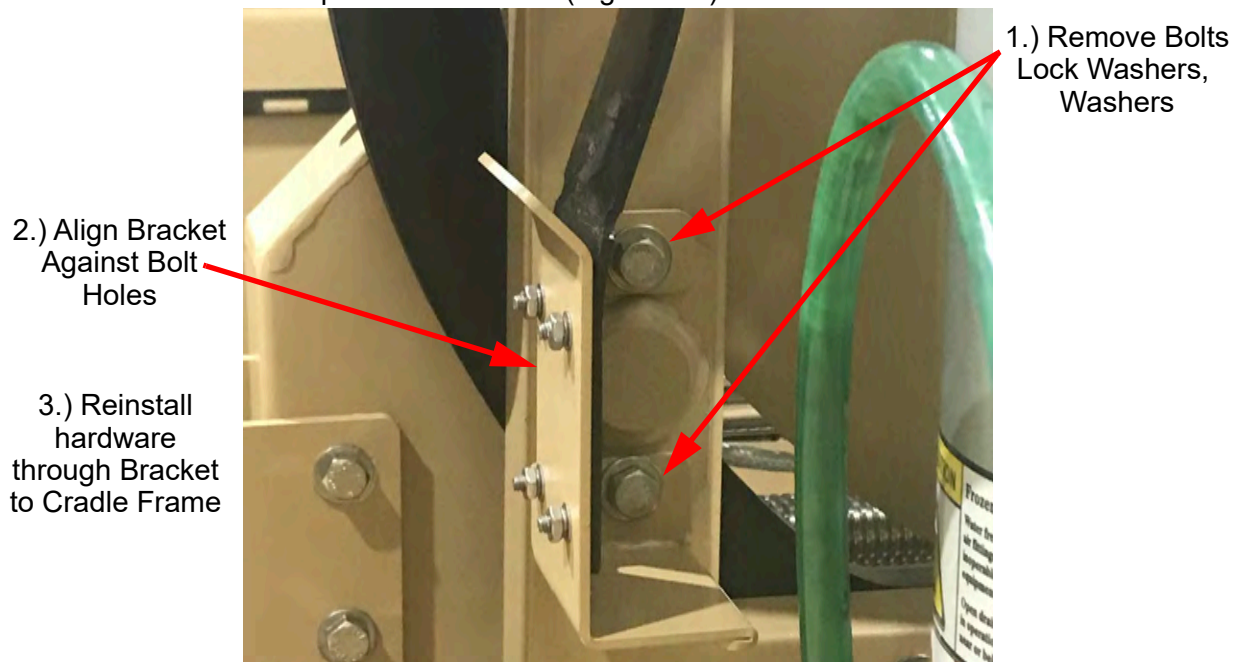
Install 1 Bracket of Cable Management Strip to Cradle Frame
